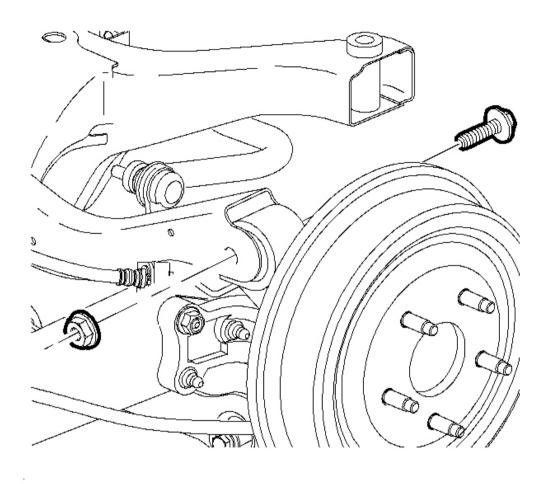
Upper Control Arm, Knuckle Bolt & Nut Courtesy of GENERAL MOTORS CORP.
